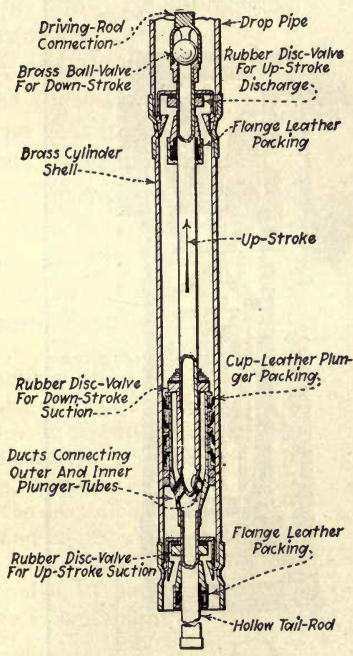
Cylinder Of Double-Acting Deep-Well Pump (Plunger Making An Upward Stroke).
